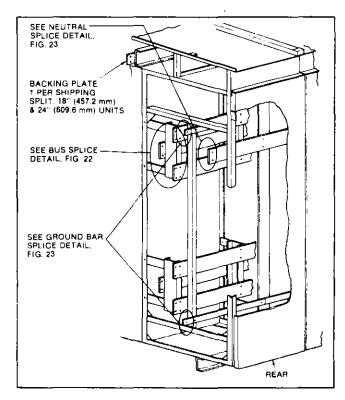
Neutral and Ground Bus Bar Connection on Outdoor Switchgear
